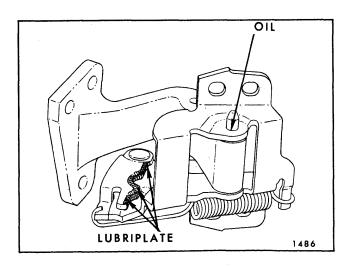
Front Door Hinge Hold-Open Assembly
